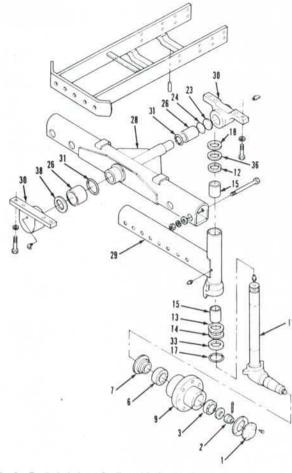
Exploded view of adjustable front axle used on Model 2110.
